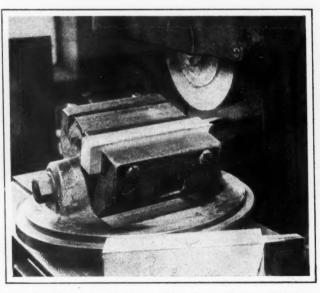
Grinding a Boring-mill Tool on a Surface Grinder
